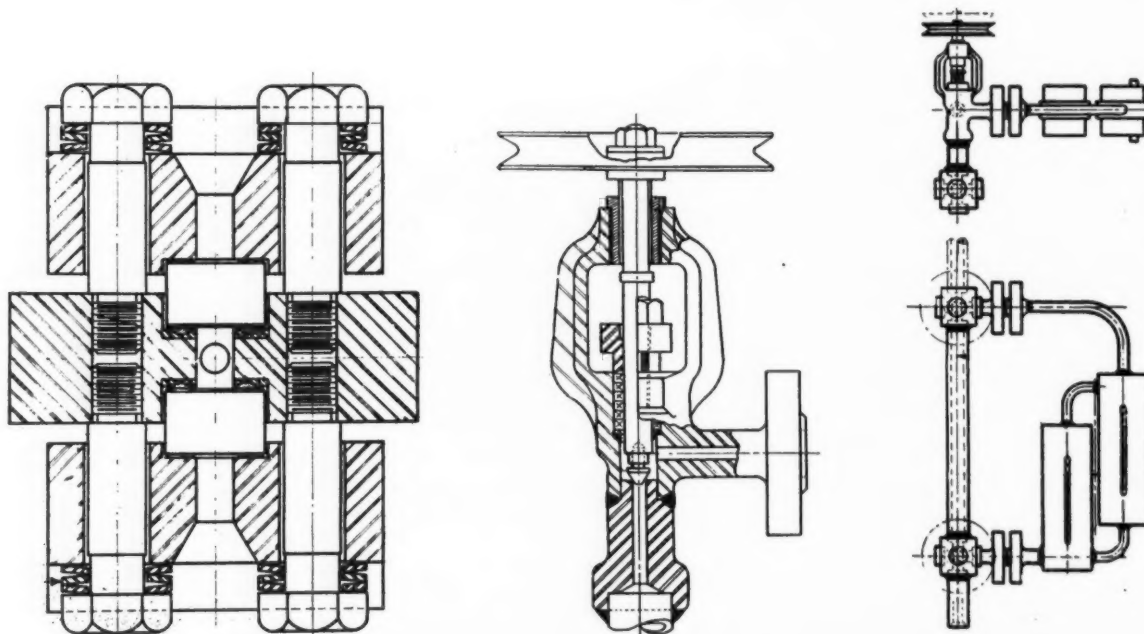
Floating-assembly pressure-sealed insert Fig. 9—Gage valve (high pressure) Fig. 10—Gage assembly with tie bar
